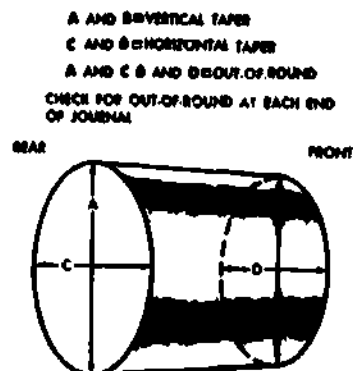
Crankshaft journal and crankpin measuring points and formula for amount of out-of-round.
